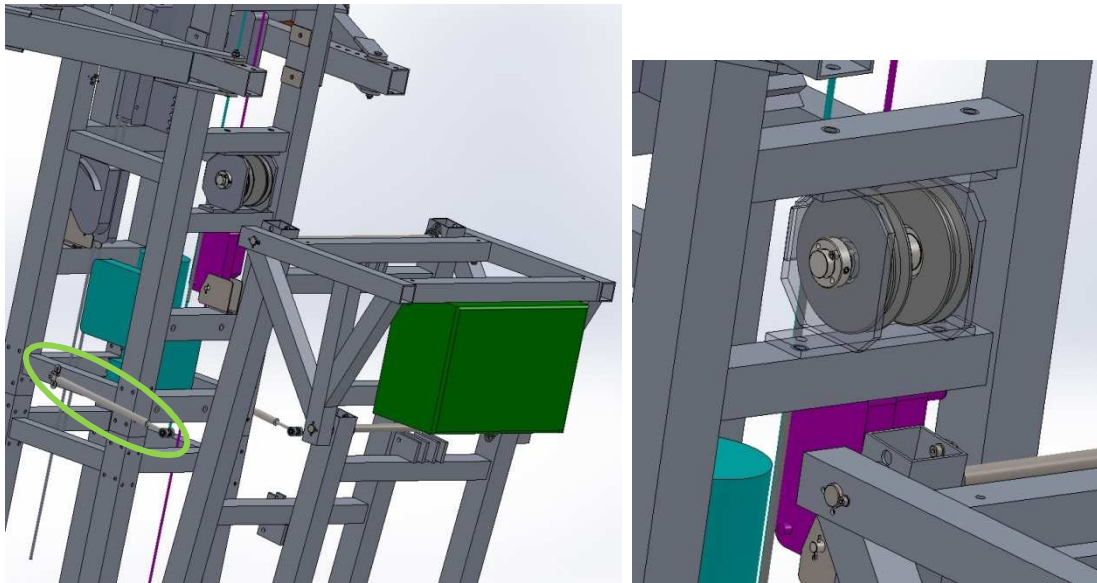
CAD snapshots of the “ladder” pulley mechanism, winch and safety mechanism.
